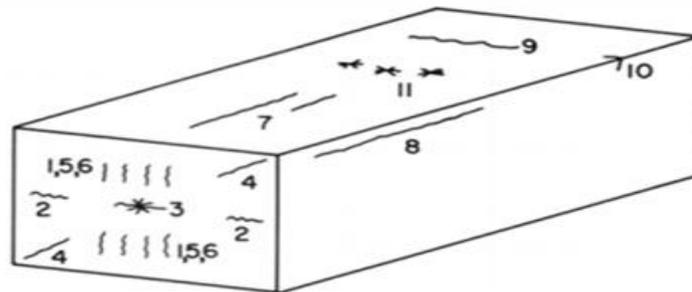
Schematic drawing of casting showing different cracks
